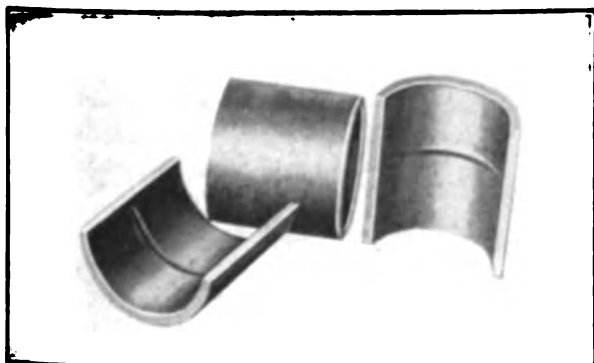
SAMPLES OF ELECTRIC FLUE WELDS
